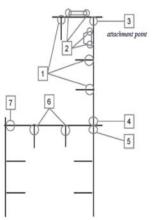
Zones of the secondary welds through the example of the support securing
